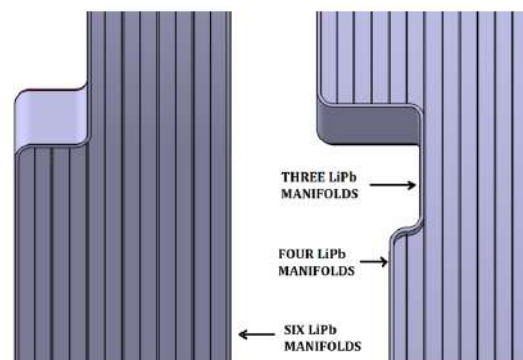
Back view of the COB segment with a detail of the PbLi manifold.
